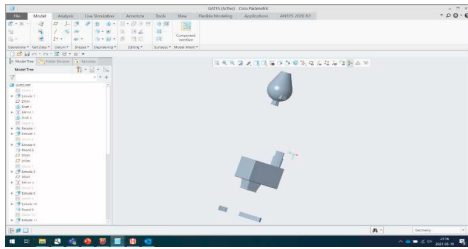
Gating system of the Caliper Isolated from the assembly
